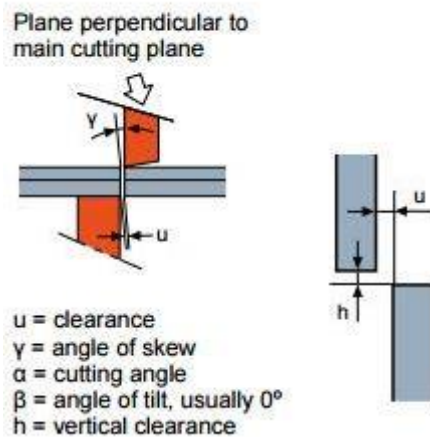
Important factors for guillotine shearing (Hot rolled steel sheets, plates and coils mechanical cutting, n.d)
